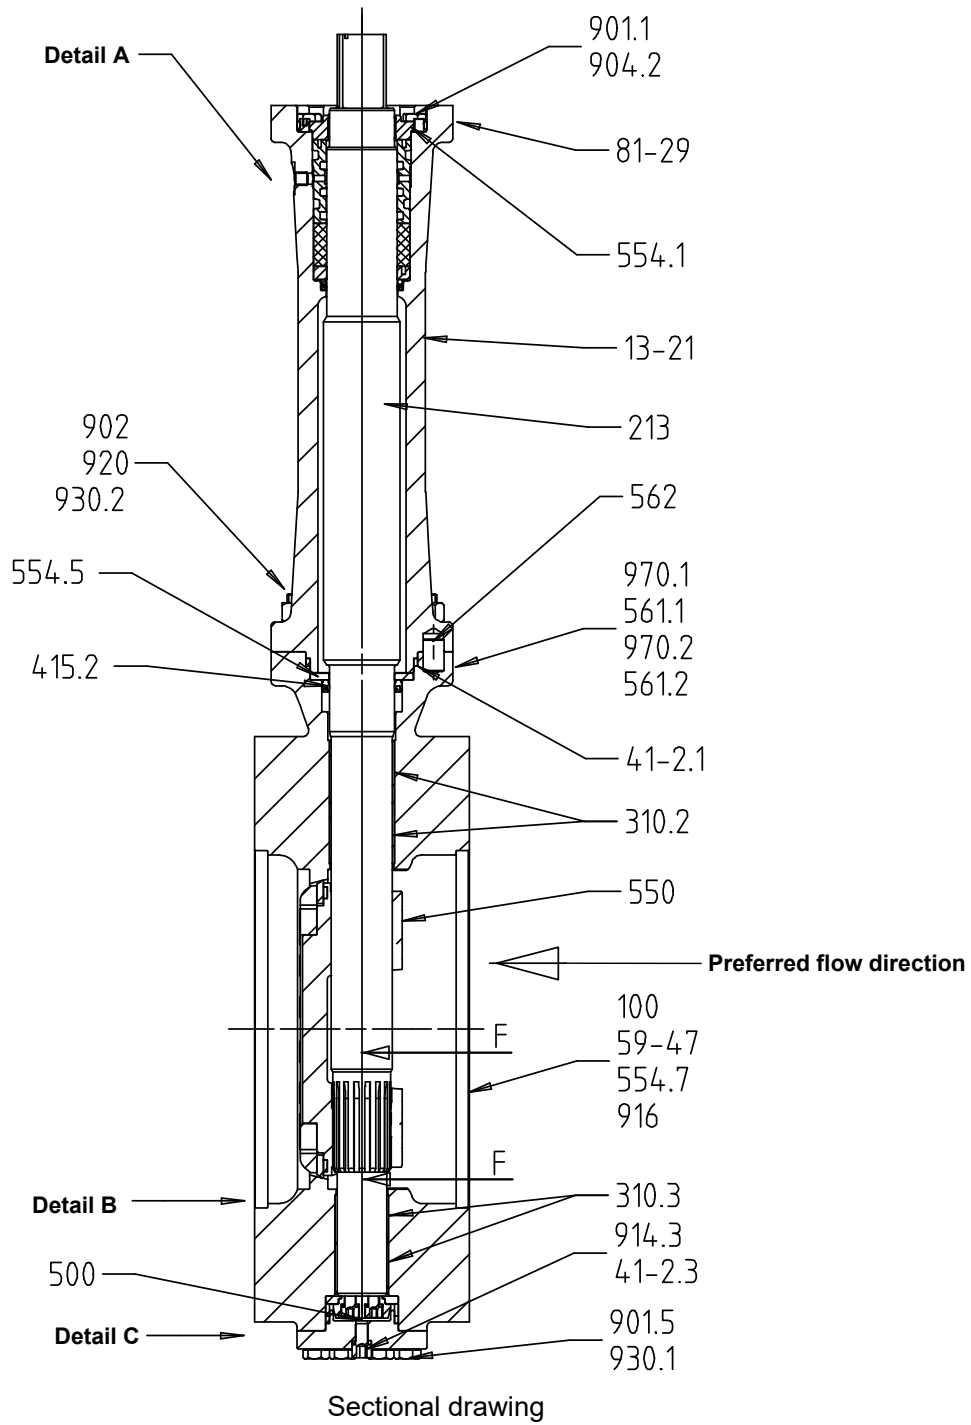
Sectional drawing of TRIODIS 300 CRYO T4 and T7 for DN 150-400 (6-16 in.)
